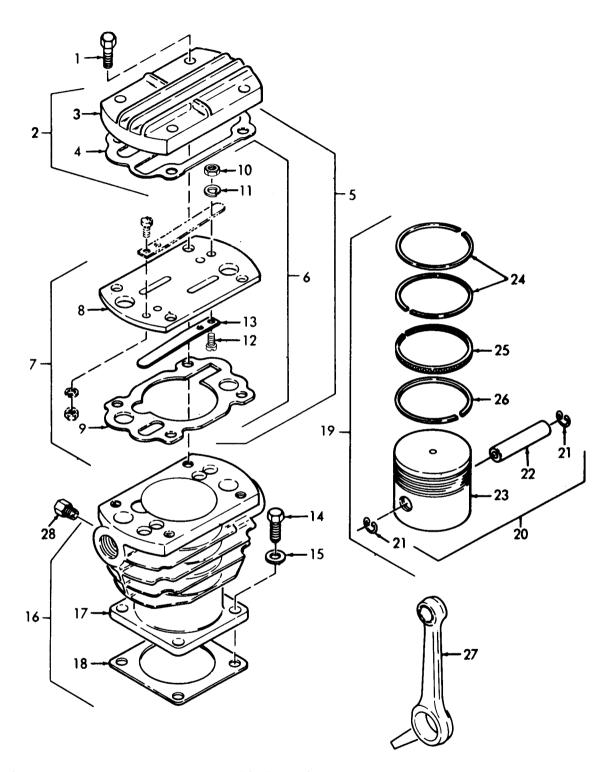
Low Pressure Cylinder Piston, Rod, and Rings, Exploded View.
